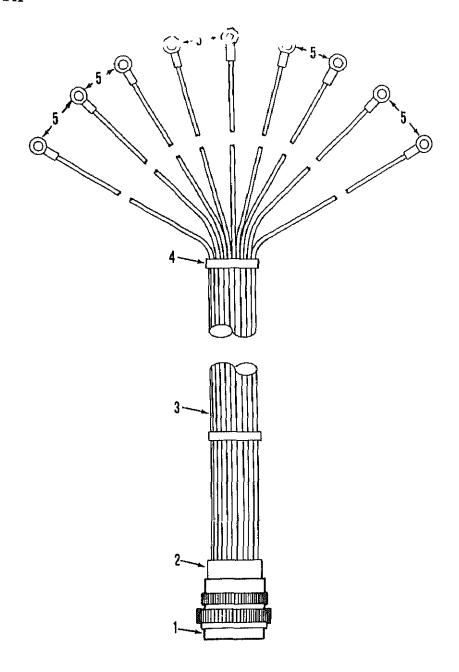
Wiring Harness, 13220E6707 TM5-4120-339-24P/9
